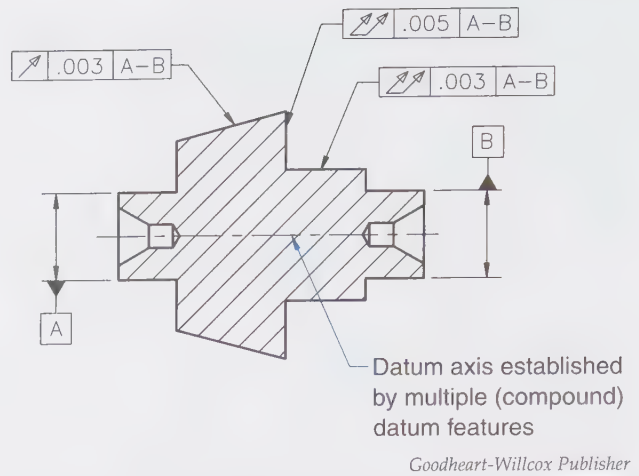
A single datum axis may be established by multiple (compound) datum feature reference.
